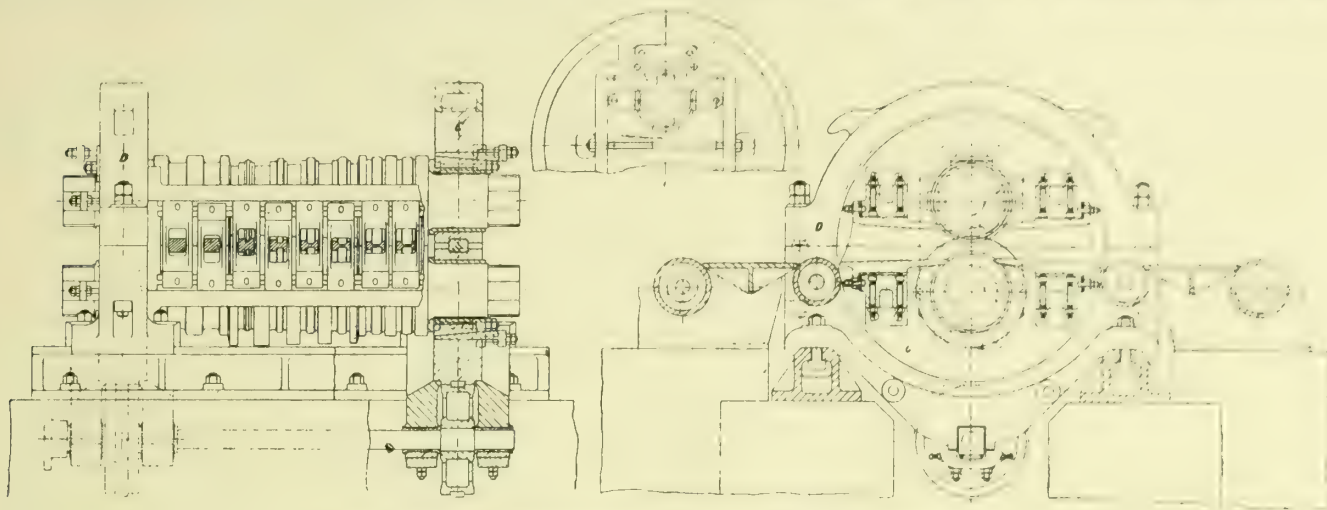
ENLARGED VIEW OF ROTATING GABLES (C) AND FIXED FRAMES (D).
